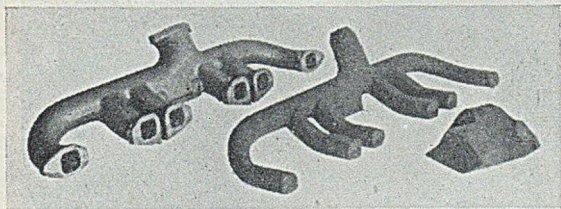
Manifold Casting for a Six-cylinder Engine and Cores (which contain Pelleted Pitch) used for its Manufacture.
